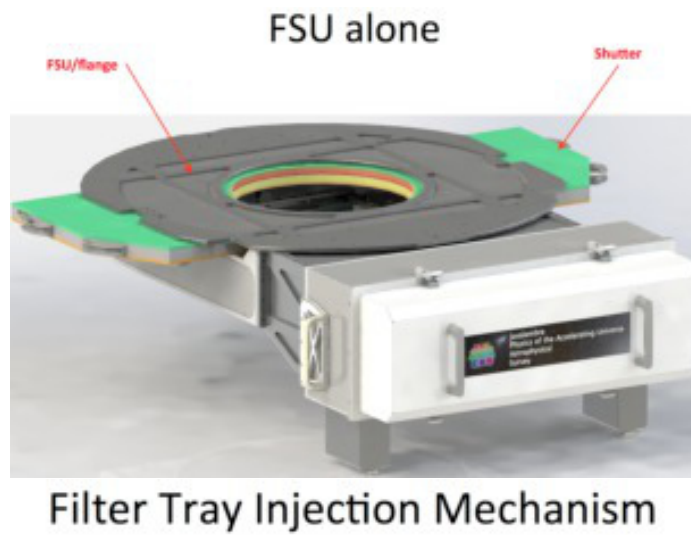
JPCam FSU (upper panel) and a closer view to the filter tray injection mechanism (lower panel)
